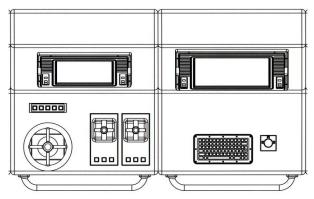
Integration of components dwg drawings with the modules disposition drawing.
